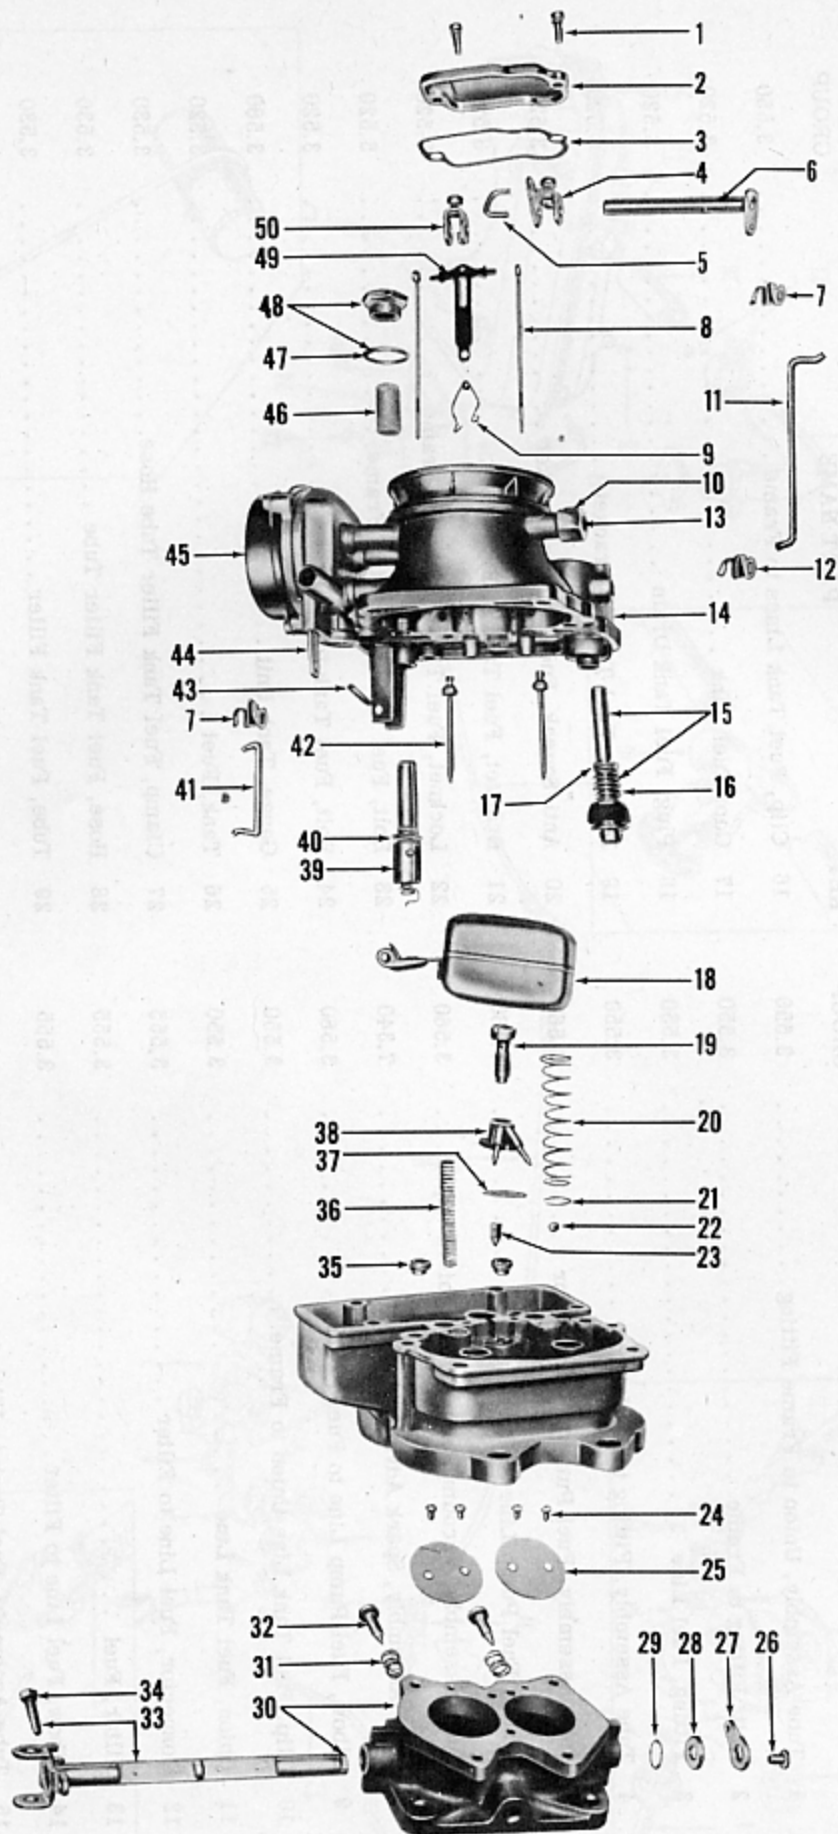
CARBURETOR - CARTER MODEL WGD-781S
